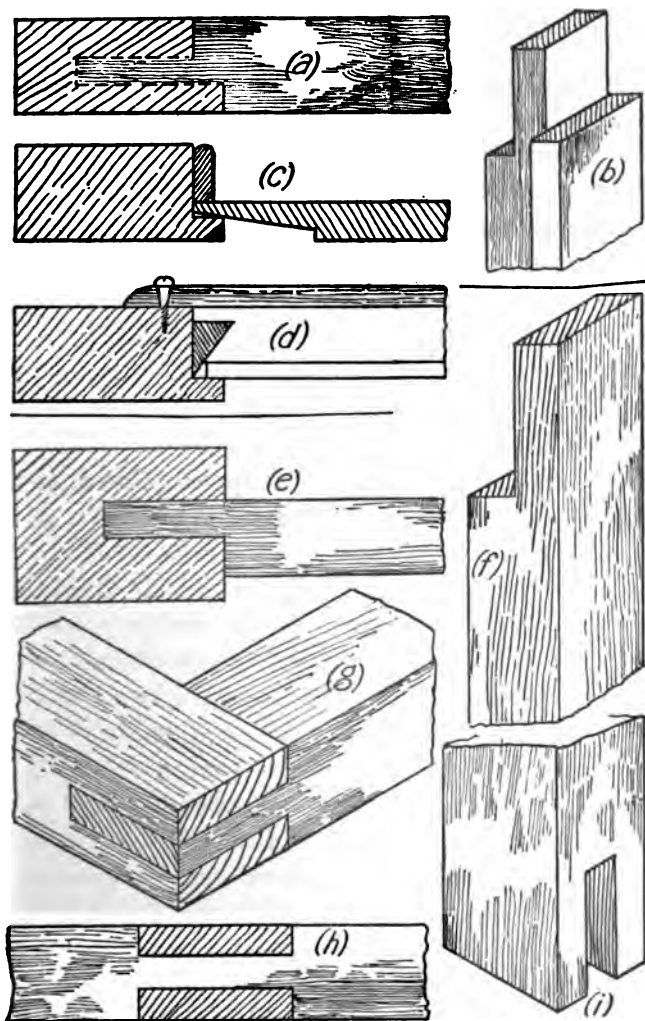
(a, b) Long and short shoulder joint ; (c) fixing panel in frame ; (d) fixing mirror and back ; (e, f) "barefaced" tenon ; (g) angle bridle ; (h, i) common bridle.
